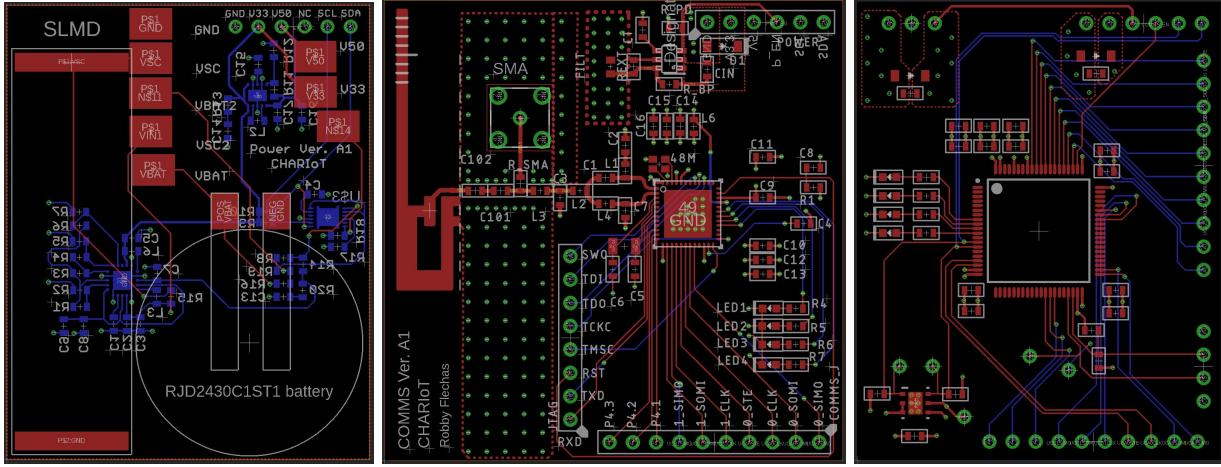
Prototype 2 PCB Board Design (left to right: power, comms, sensor)
